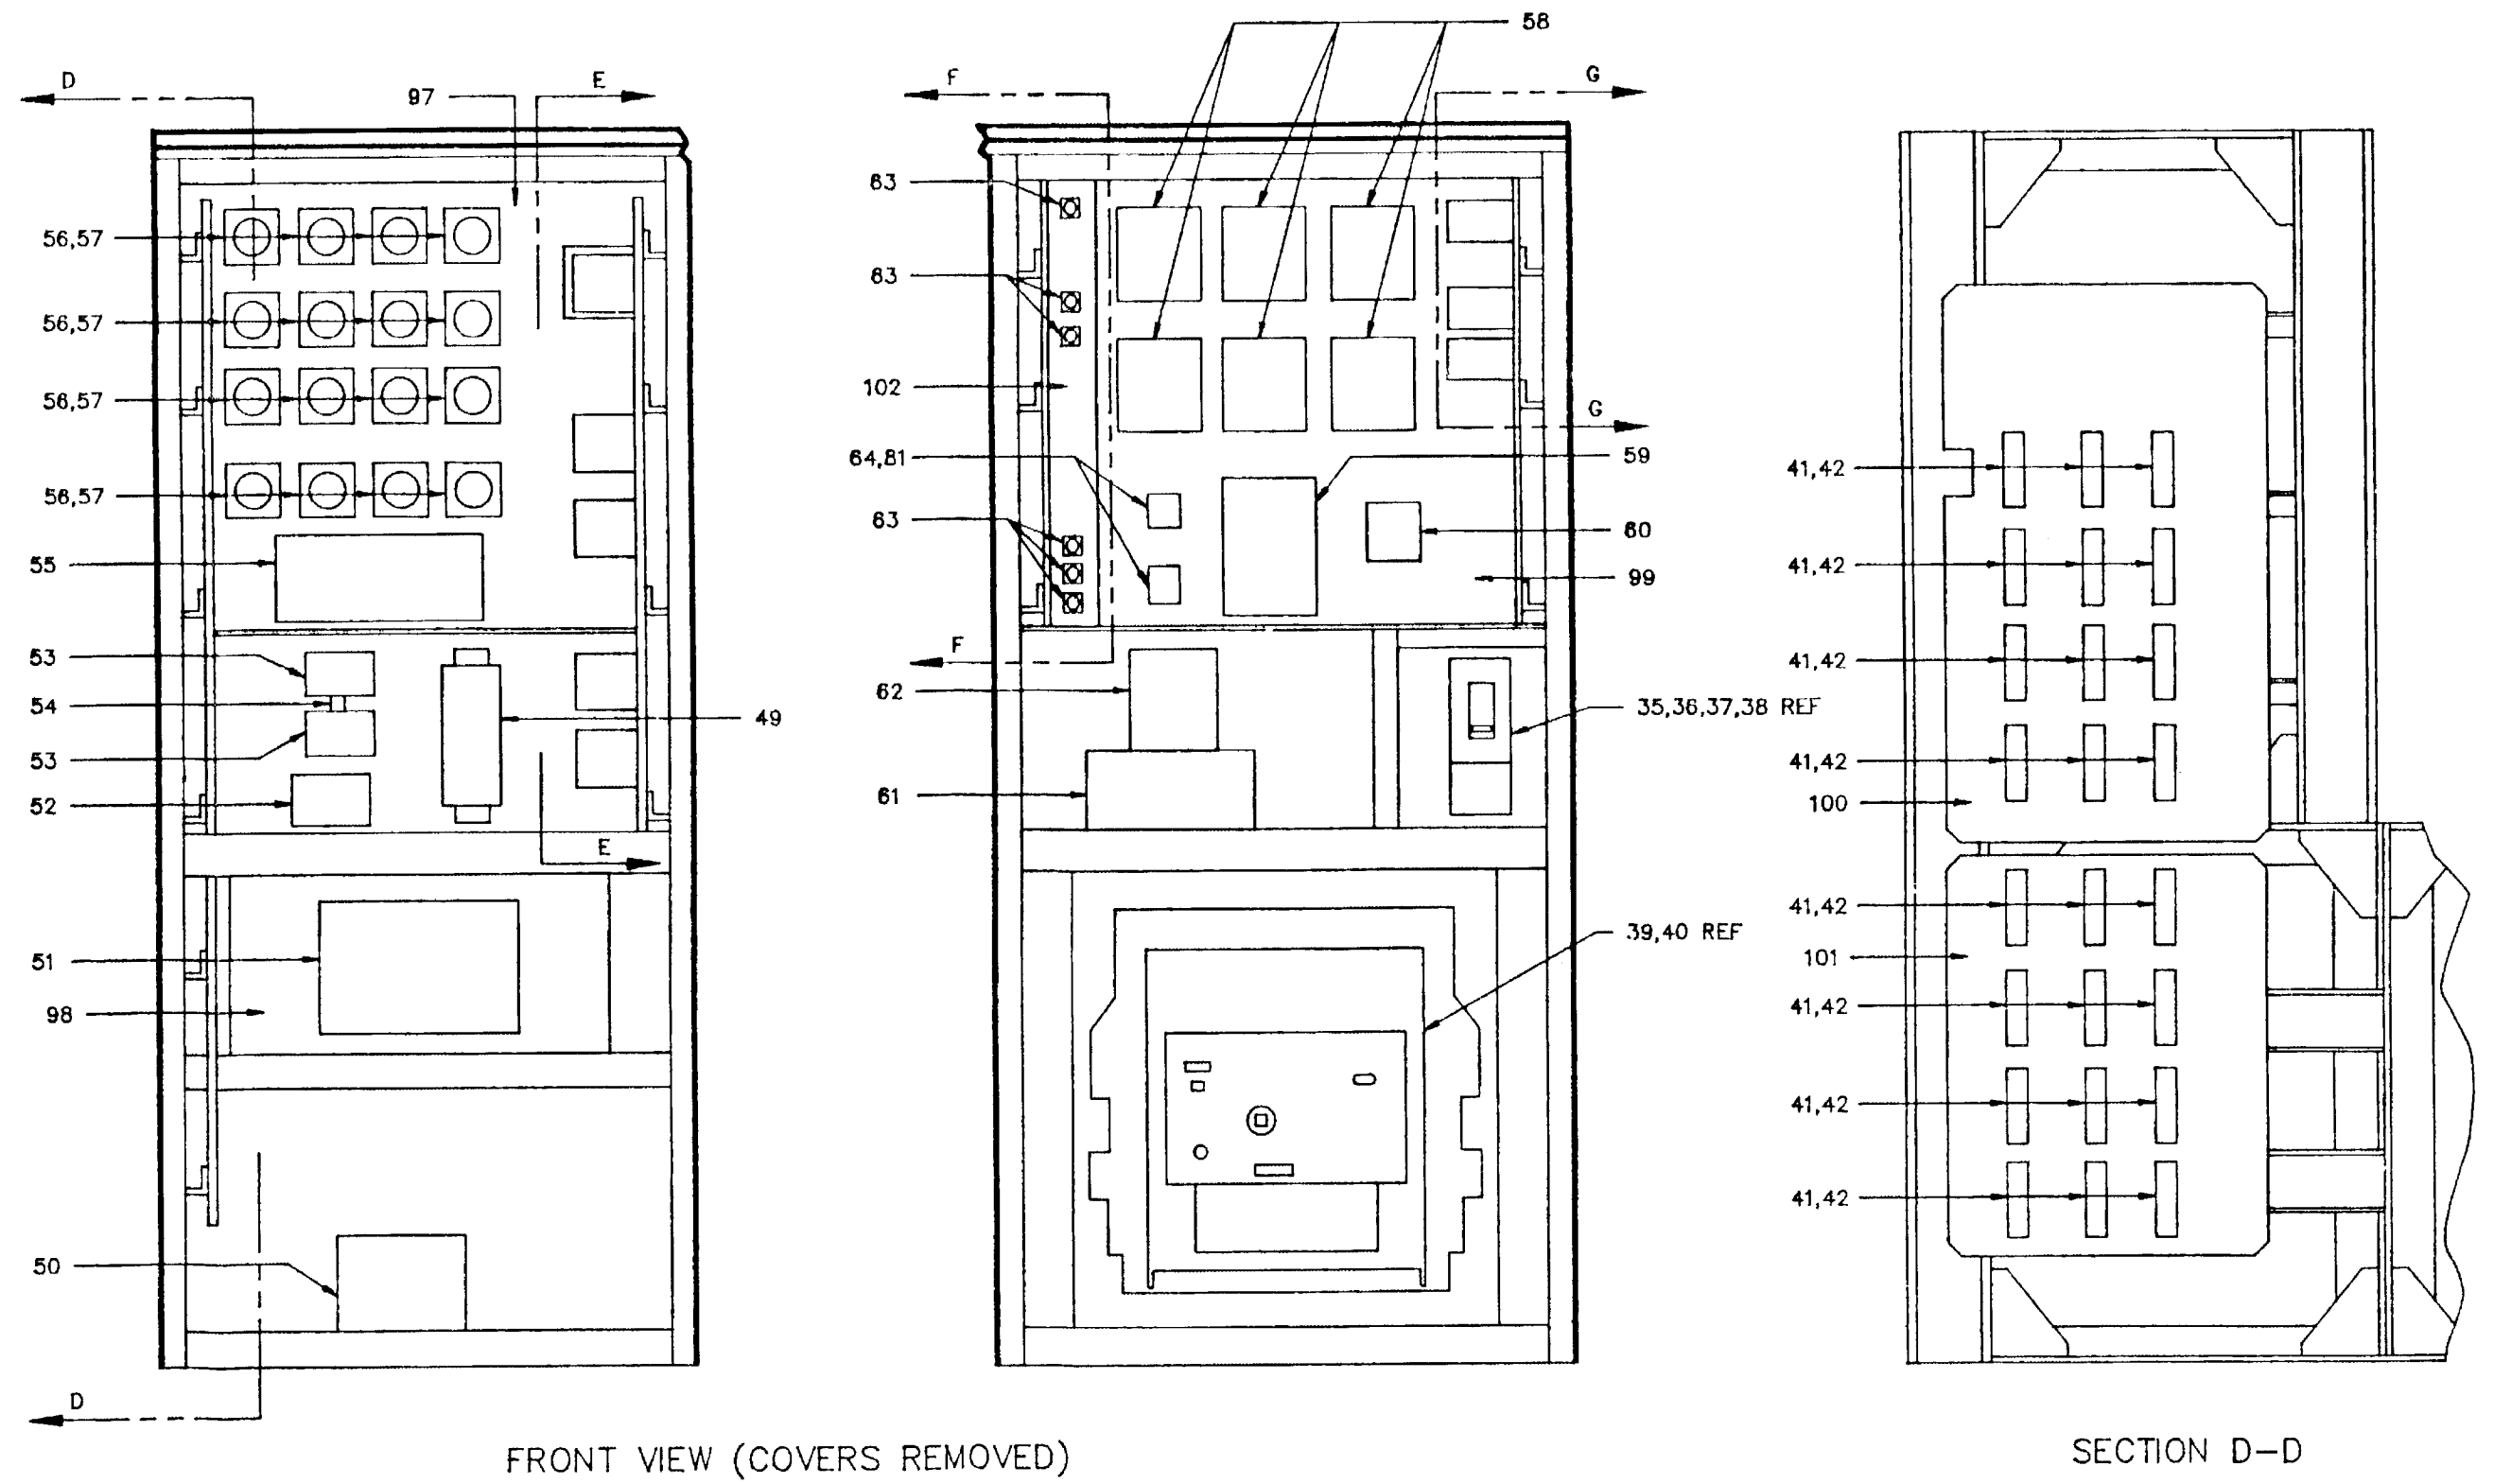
ISG Switchboard Assembly (Sheet 2 of 3)
